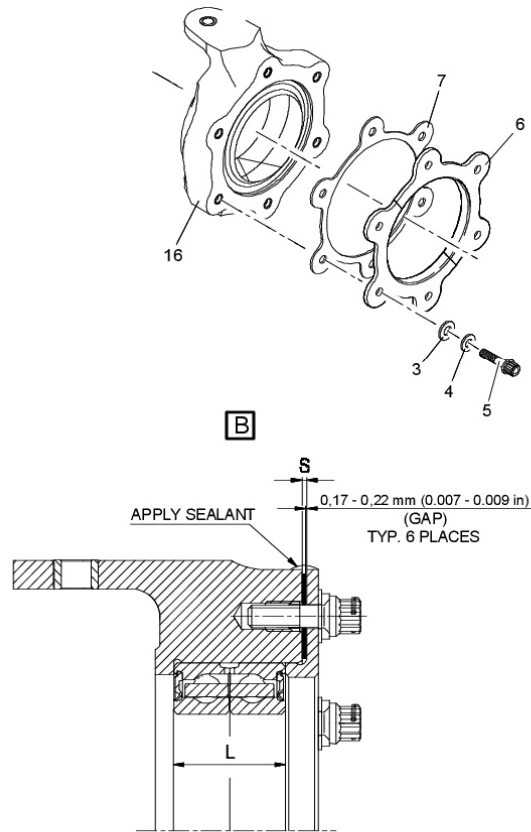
(sheet 1 of 5). Housing and slider group - Assemble procedure (Sleeve assy P/N 109G6430A03)
